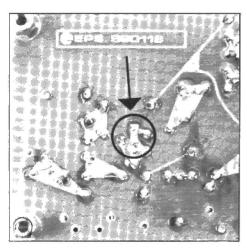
SMD capacitor C4 is soldered at the track side of the board, between the spots provided for R3.
